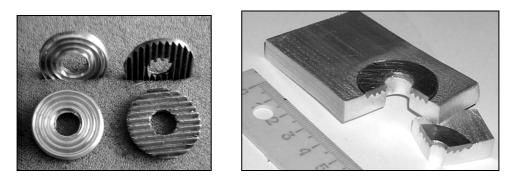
The sheathing of the aluminium bands' contact zones: a) the shape of the copper plate; b) unilateral sheathing
